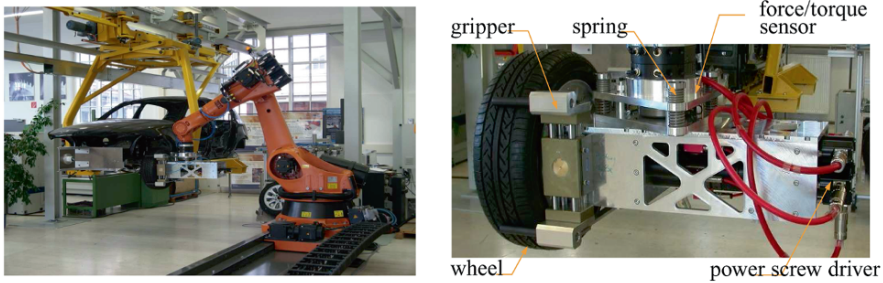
(a) Setup for wheel assembly. (b) Compliant end-effector with force/torque sensor in the center of the springs.
